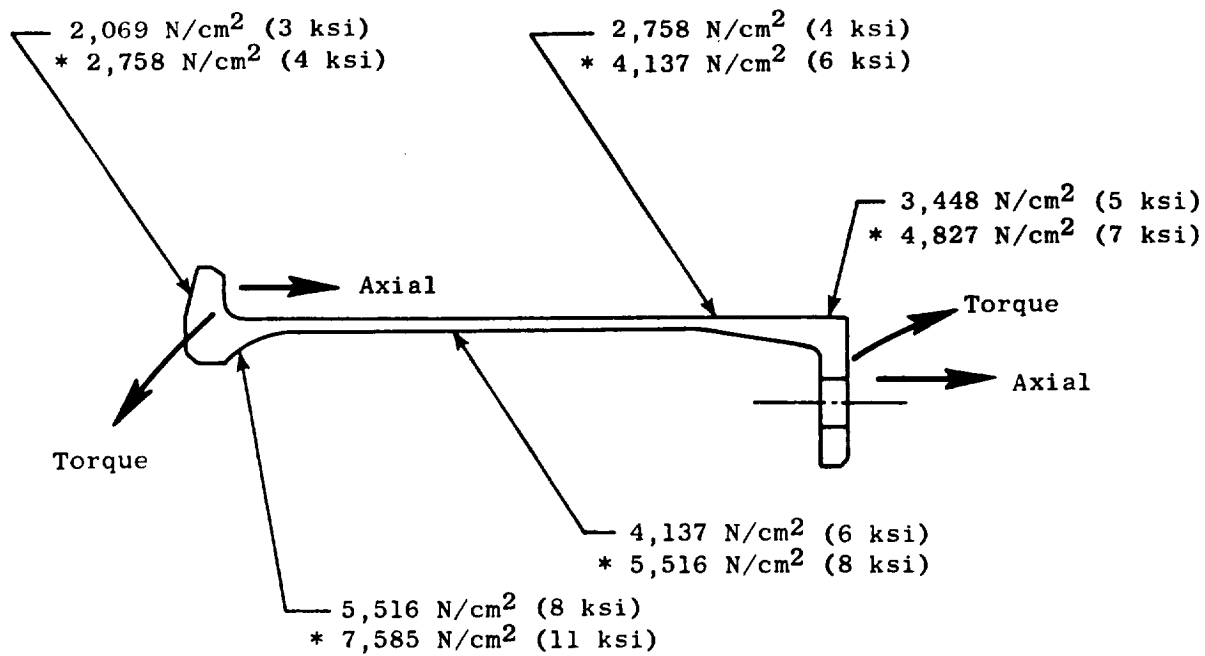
Forward Ring Gear Design Loads and Stresses.
